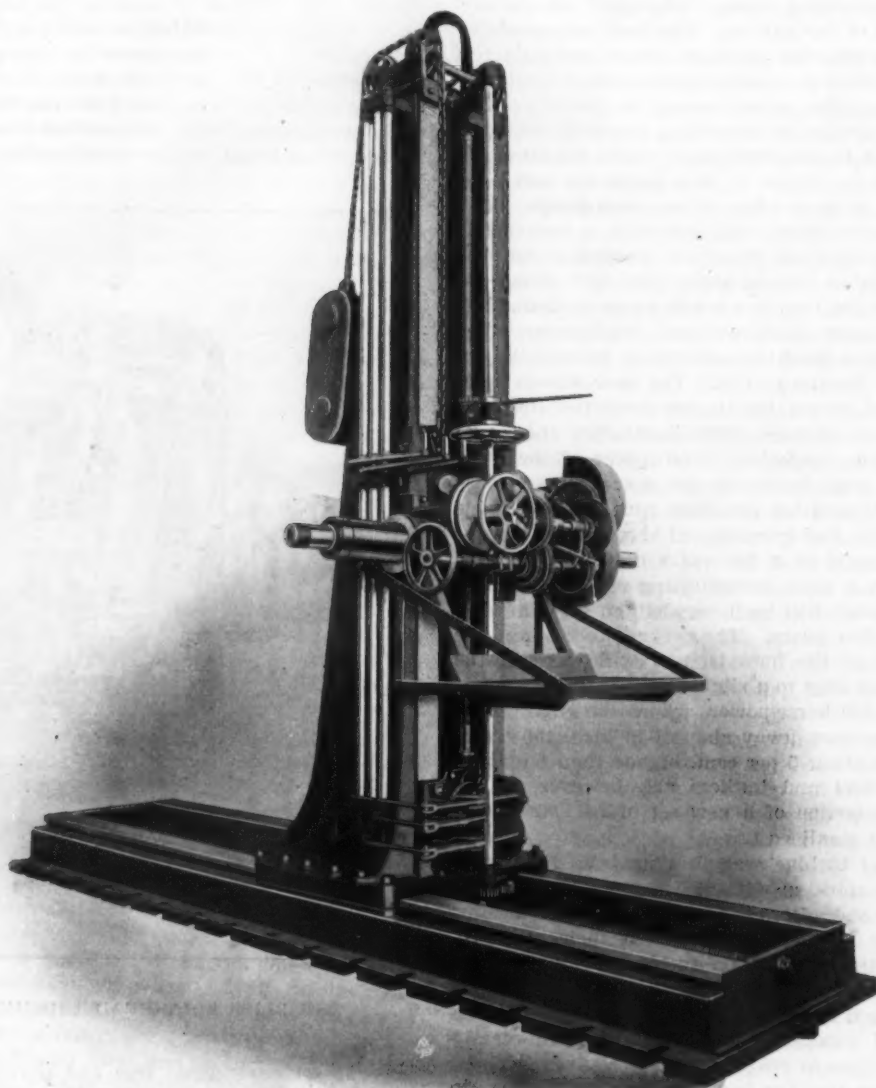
The Pawling & Harnischfeger Horizontal Drilling and Boring Machine.
